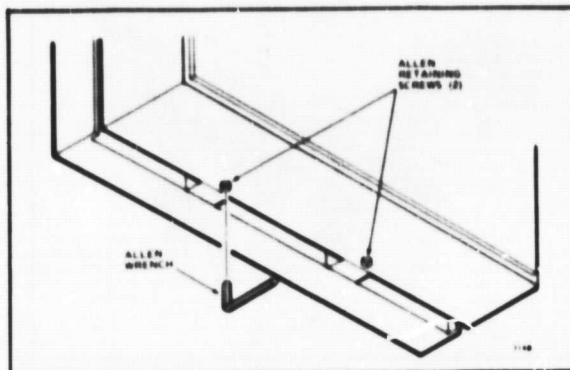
INSTALLATION LOCKING COVER SCREWS ASSEMBLY.
